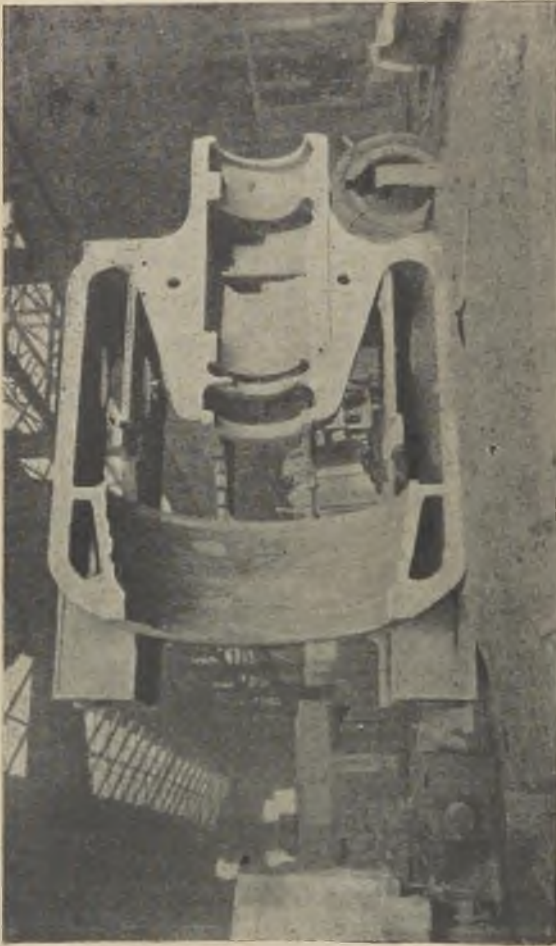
SHOWS CASTING. NOTE INTRICATE CORING.
